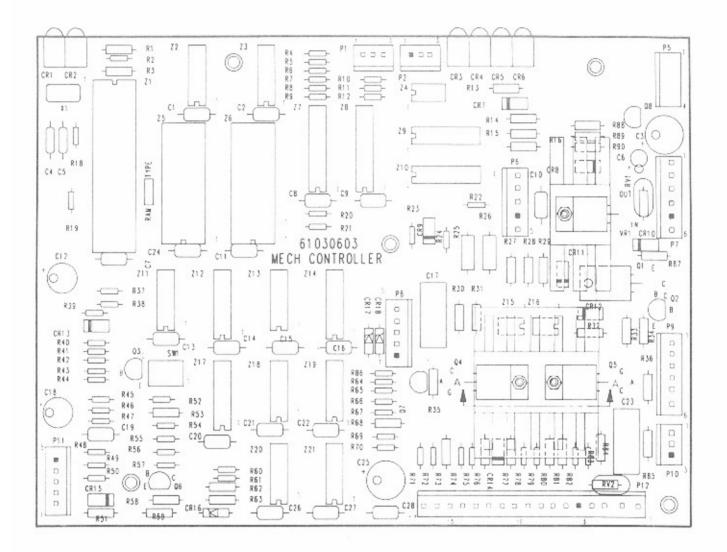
C. Mechanism Control Assembly Circuit Board Layout
